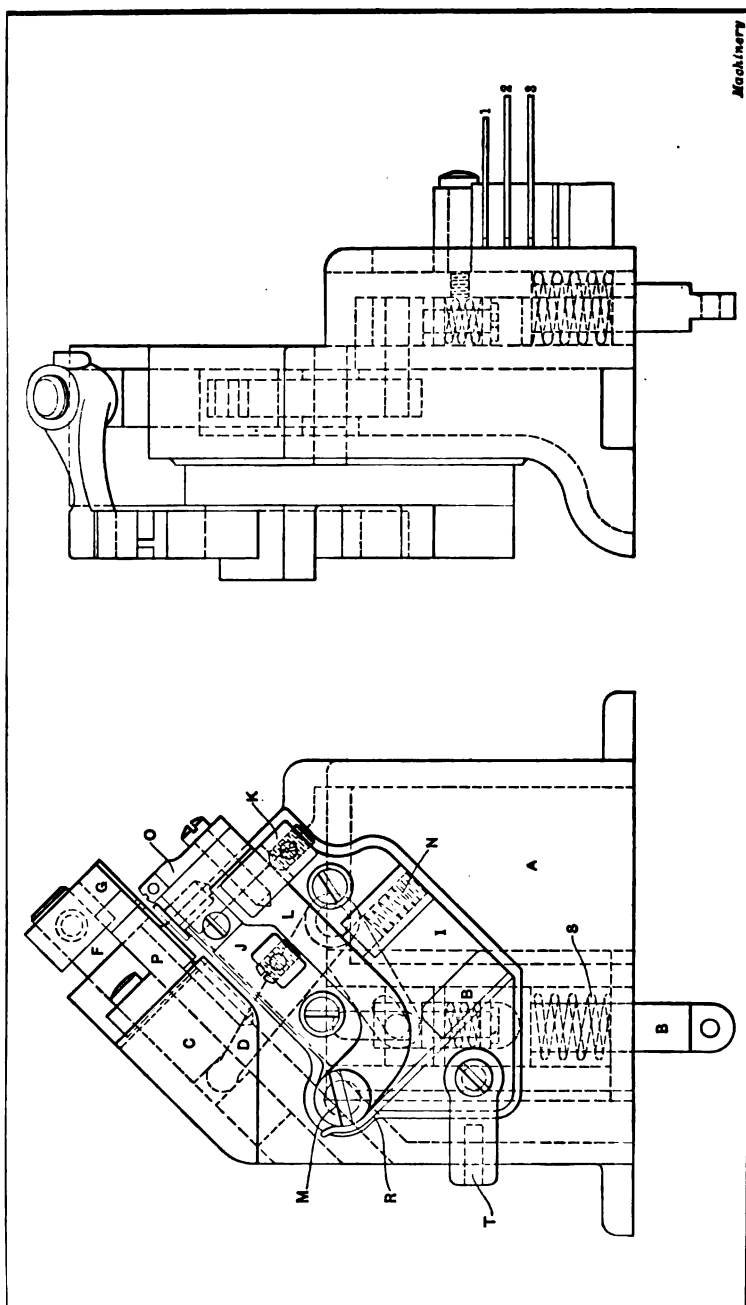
Machine for Soldering Straps to Eye-pieces and Bridges
